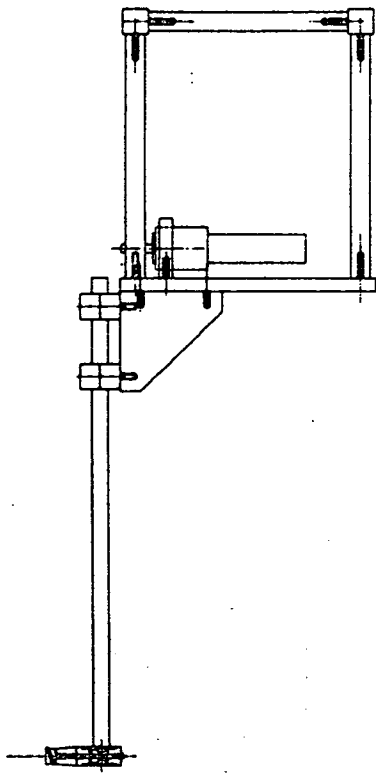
(v) Assembly drawings of the model wind turbine rig.
